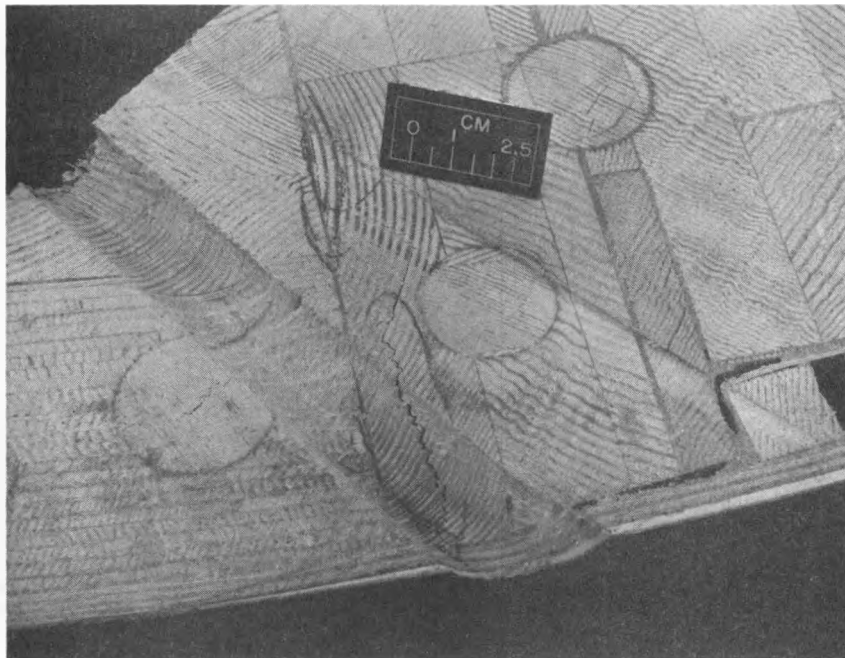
Root end build-up for stud installation showing only crack found in entire 20 foot wood test section.
